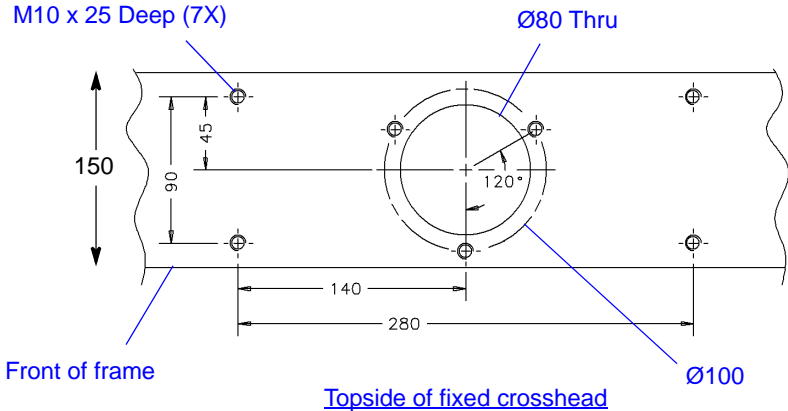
Series 5560 - Fixed Crosshead Mounting Dimensions
